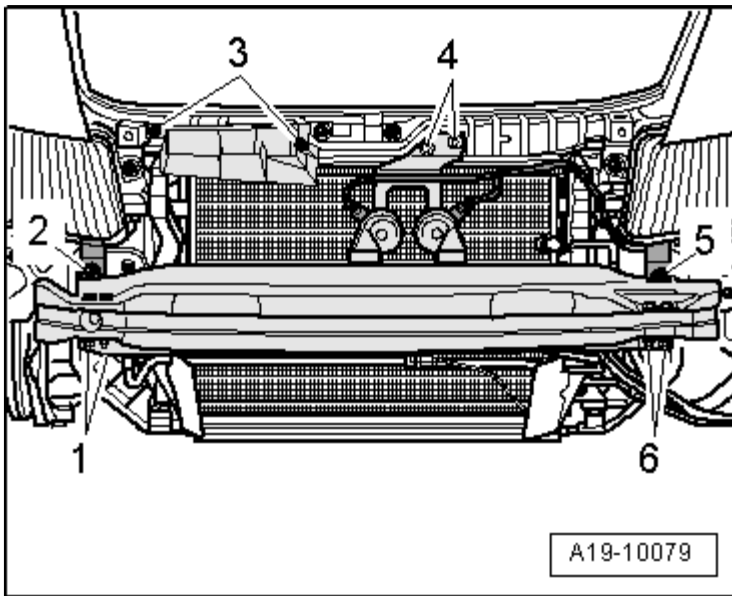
Identifying Bolts, Brackets, Bumper & Air Duct
